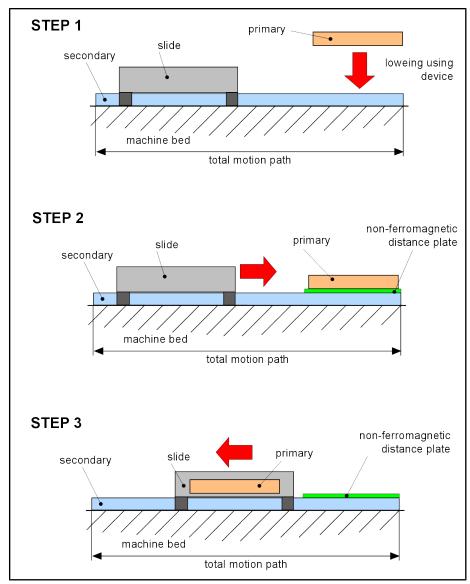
Installation of the linear motor components at whole secondary part over the entire traverse path
